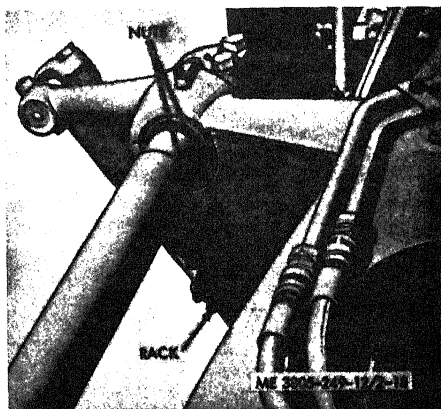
Sideshift rack set for right hand shoulder cleanup.
